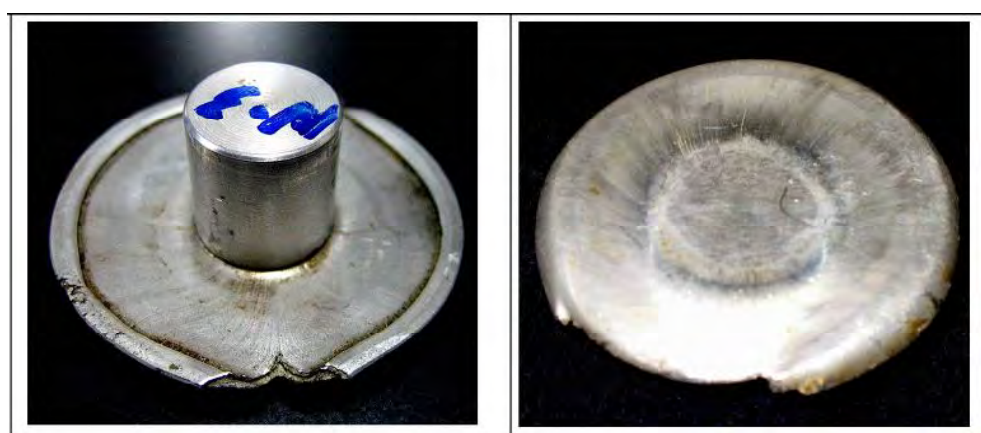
Outlook of expansion forging of extruded AZ61
